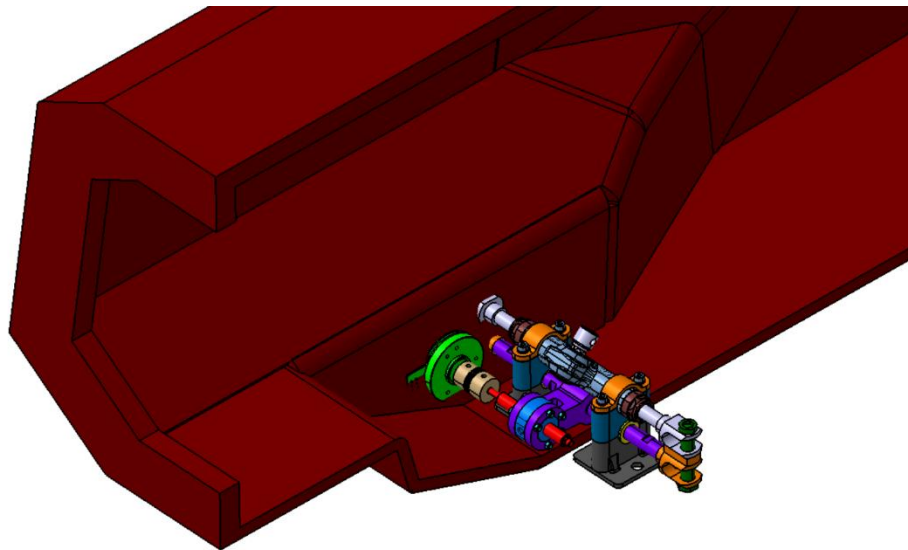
Chosen solution - BLDC motor with a ball screw drive and actuating link
